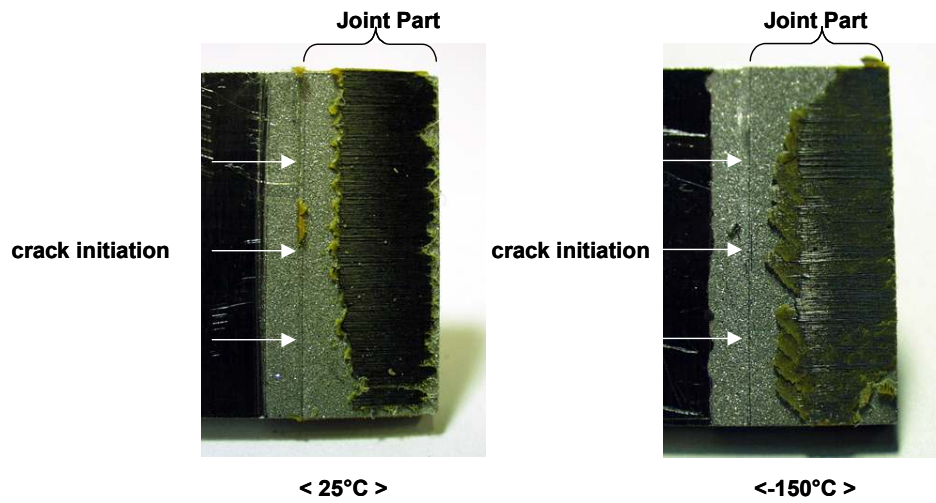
Fracture surface of FM73-inserted double-lap joint specimen at RT and CT
